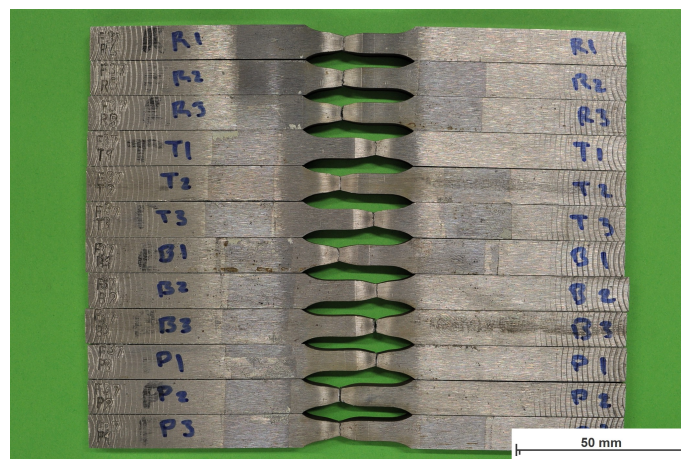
Butt weld tensile samples, as-welded (R), EBLPWHT (T), EBLPWHT (B) and EBLPWHT (P).
